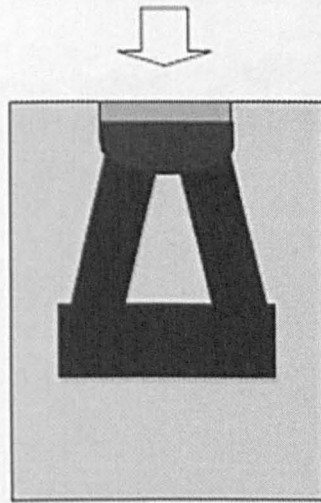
Schematic of the pressure casting process, where liquid Co-Cr-Mo alloy infiltrated into the casting mould under pressure.
